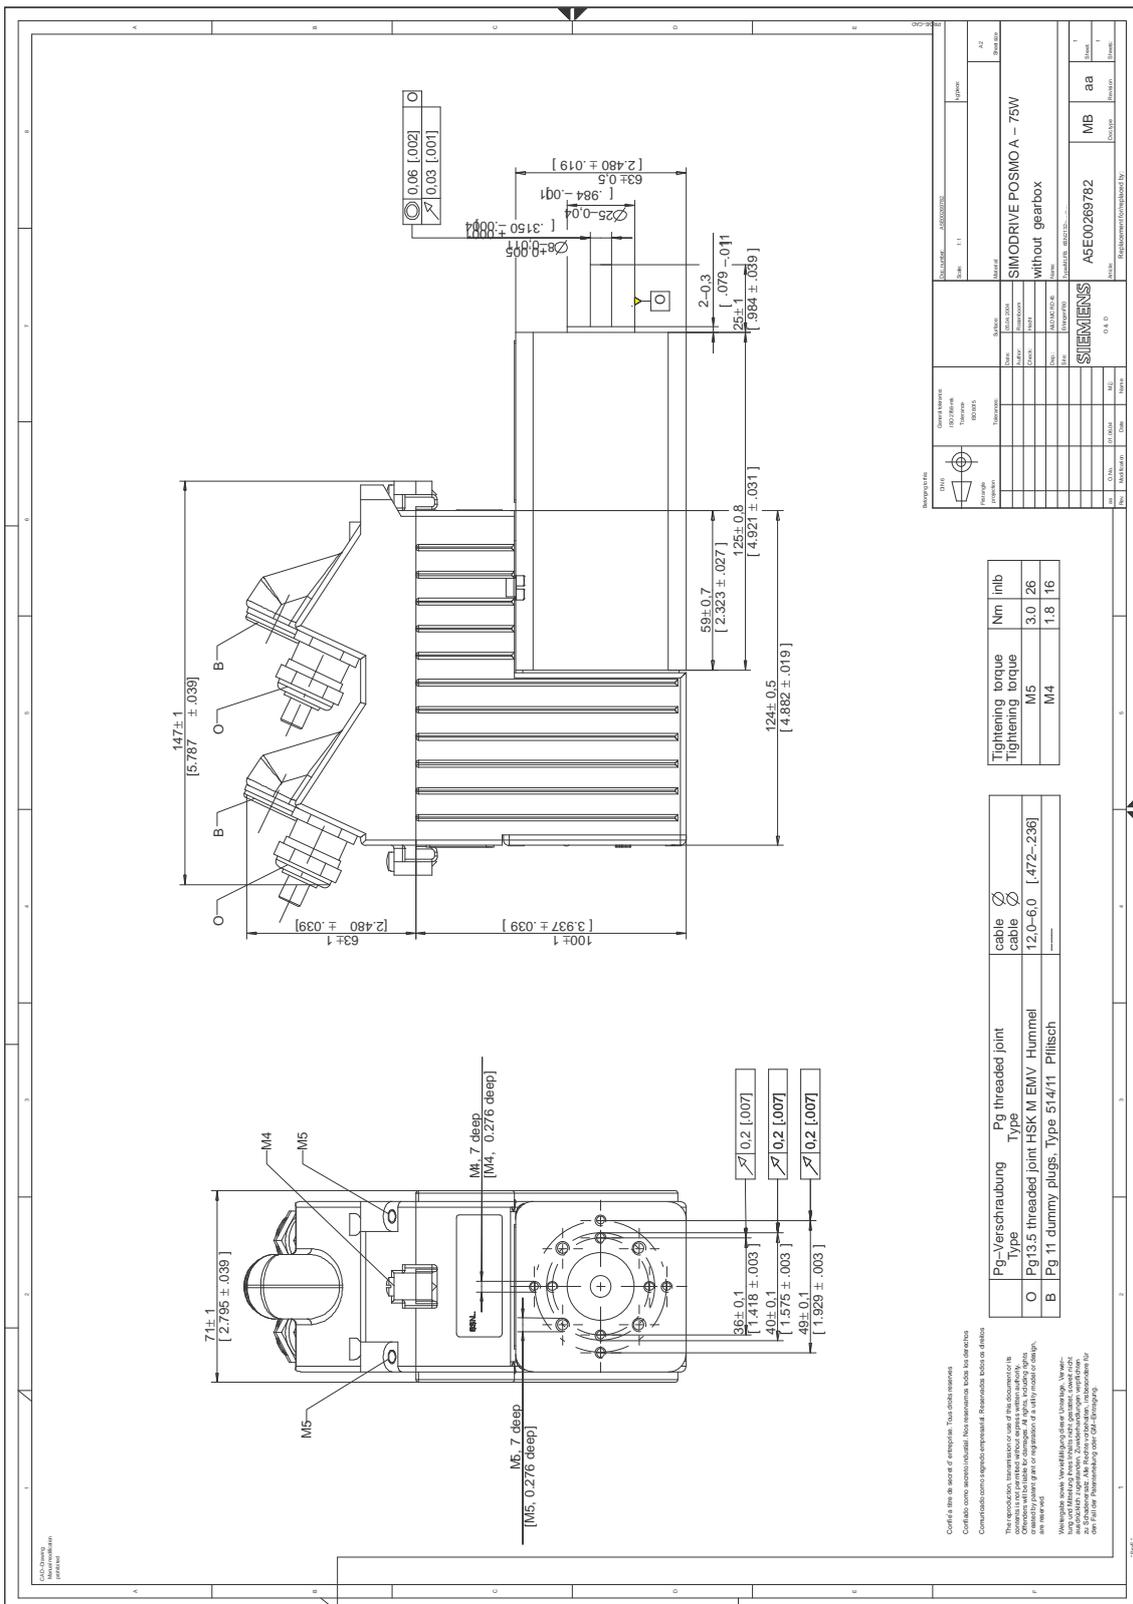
Dimension drawing: SIMODRIVE POSMO A – 75 W without gearbox
